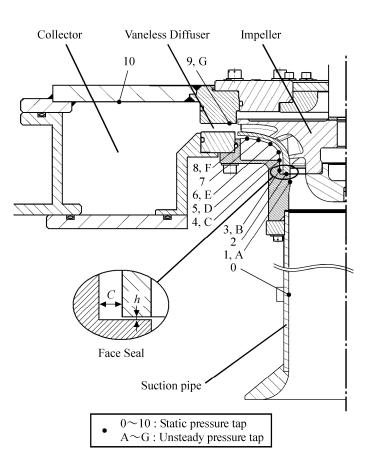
Schematic of pump cross-section with grooved casing, indicating locations of pressure taps
